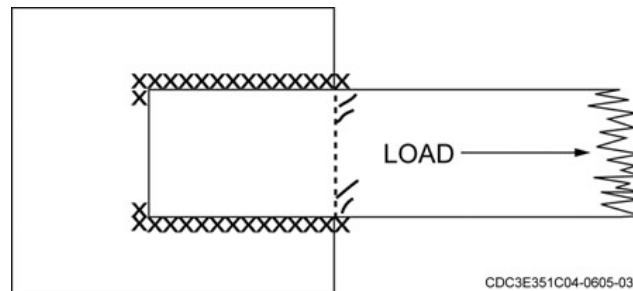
Welding around corners to resist tearing (flat position).
